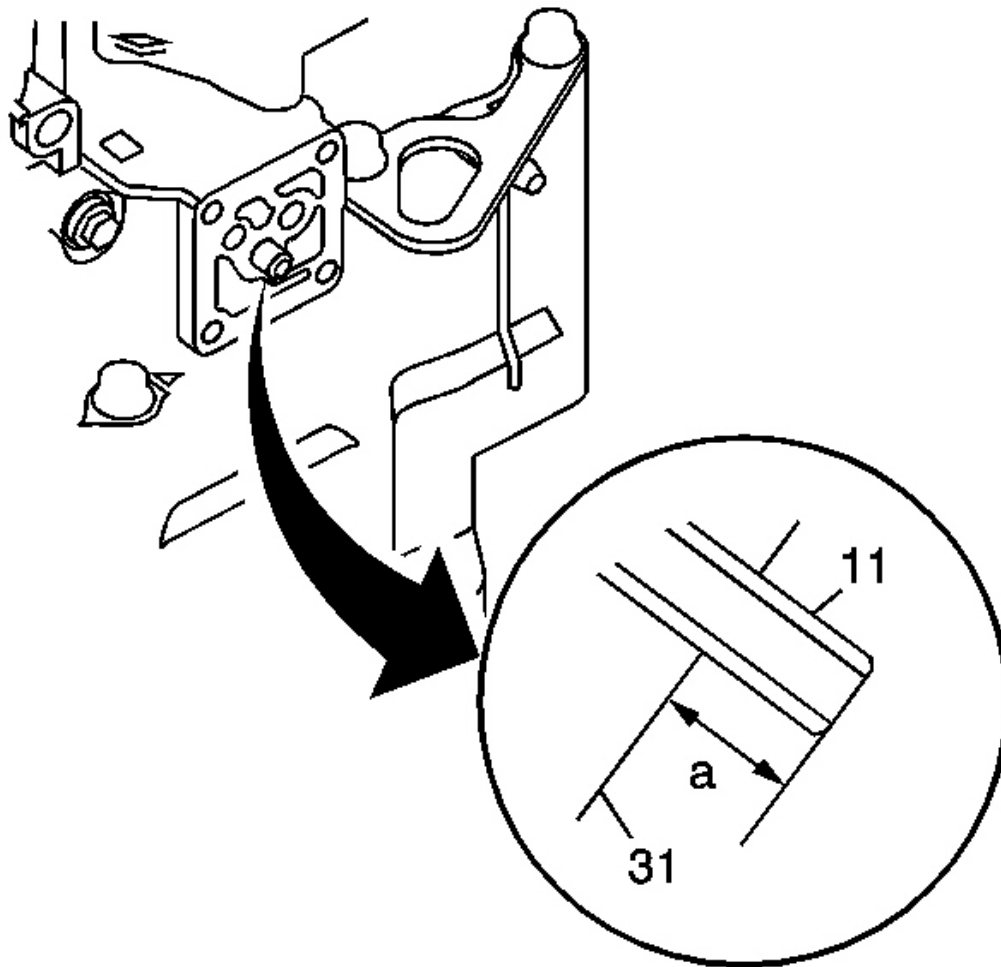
Measuring The Top Of Fluid Passage Tube To Machined Surface Of Transmission Case
